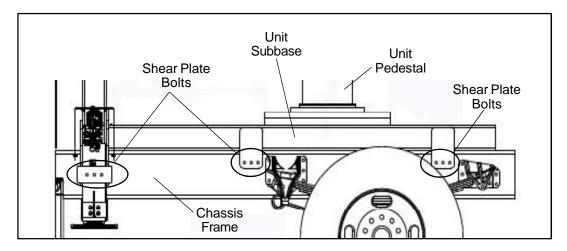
Typical Bolt Locations - Number of Bolts Differ with Models
